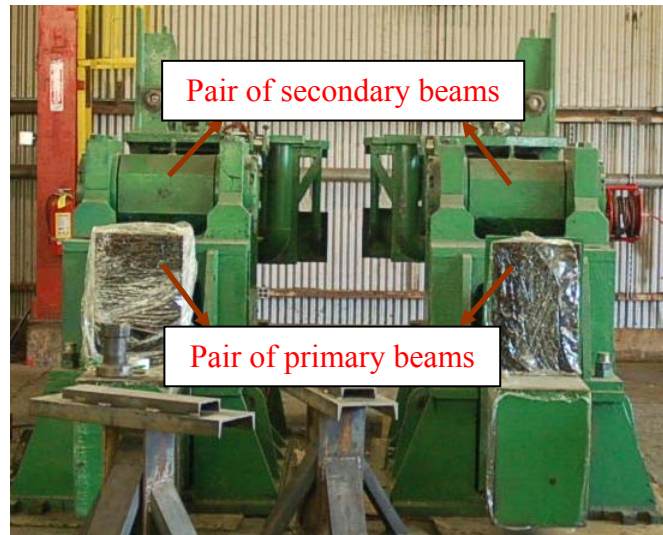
Backview of the caster mold oscillation system assembled at the workshop
